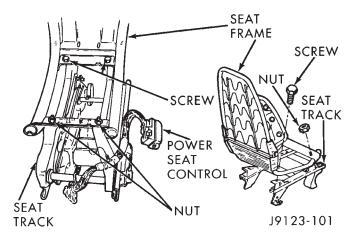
Power Seat Frame Removal/Installation INSTALLATION
